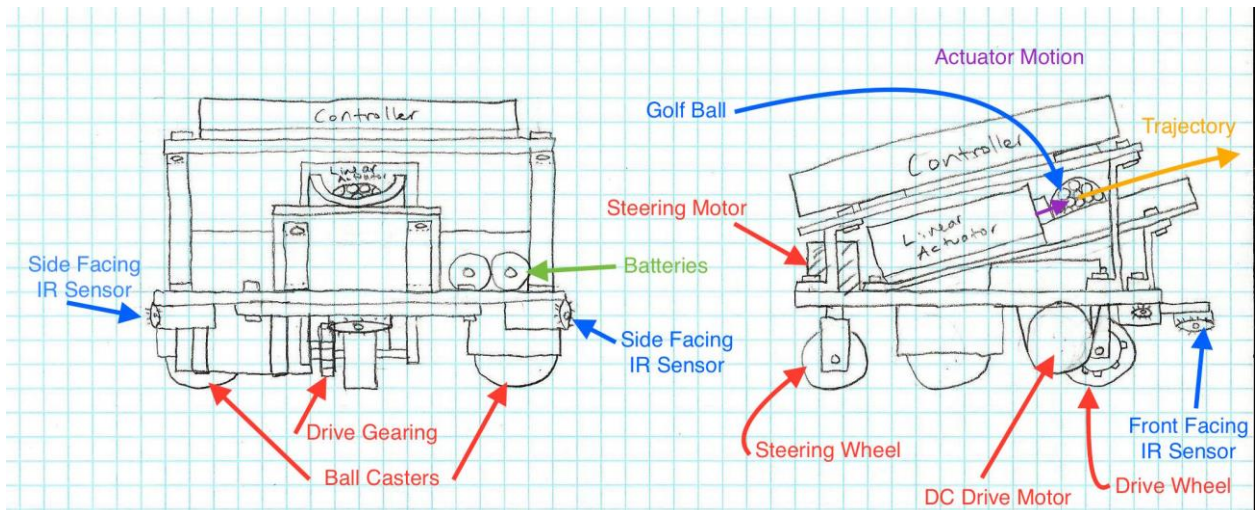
Design concept utilizing linear actuator, single geared FWD, and single rear active steering.
